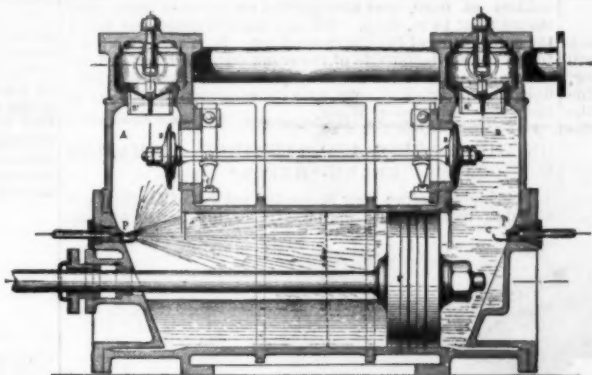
LONGITUDINAL SECTION OF THE COMPRESSING CYLINDER. (ONE-TENTH ACTUAL SIZE.)
